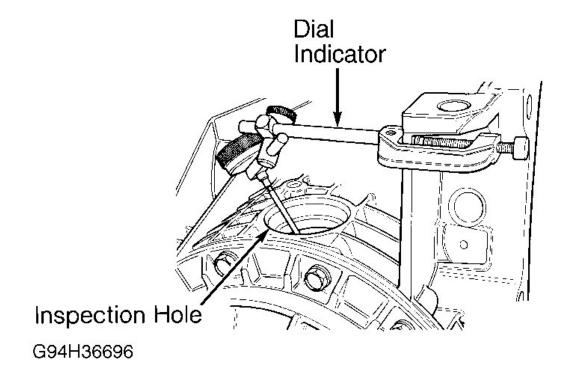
Checking Ring Gear Backlash Courtesy of CHRYSLER LLC
